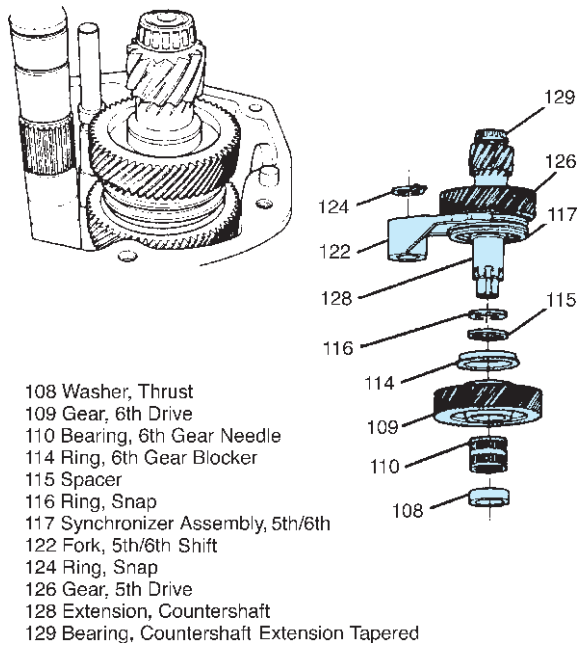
With the 5th/6th driven gear removed, the countershaft extension with the 5th and 6th drive gears and synchronizer assembly can be removed. (Courtesy of Transmission Technologies Corporation, TTC)
